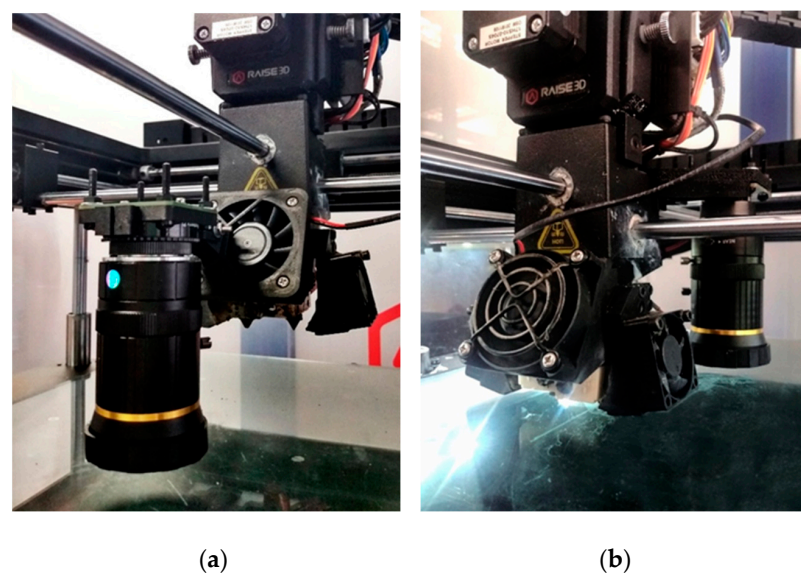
Integration of 3D-printed customizable tools and hardware for detection (i.e., image capturing): (a) Mounting Module A (frontside); (b) Mounting Module B (backside).
